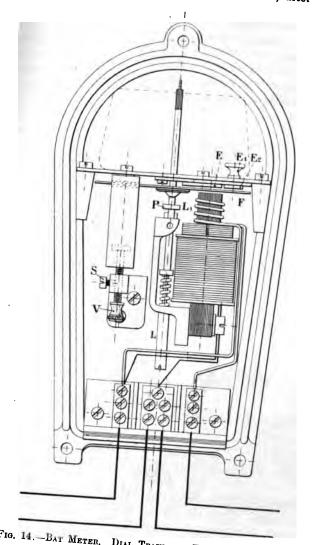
BAT METER. DIAL TRAIN AND TOP BEARING REMOVED.
